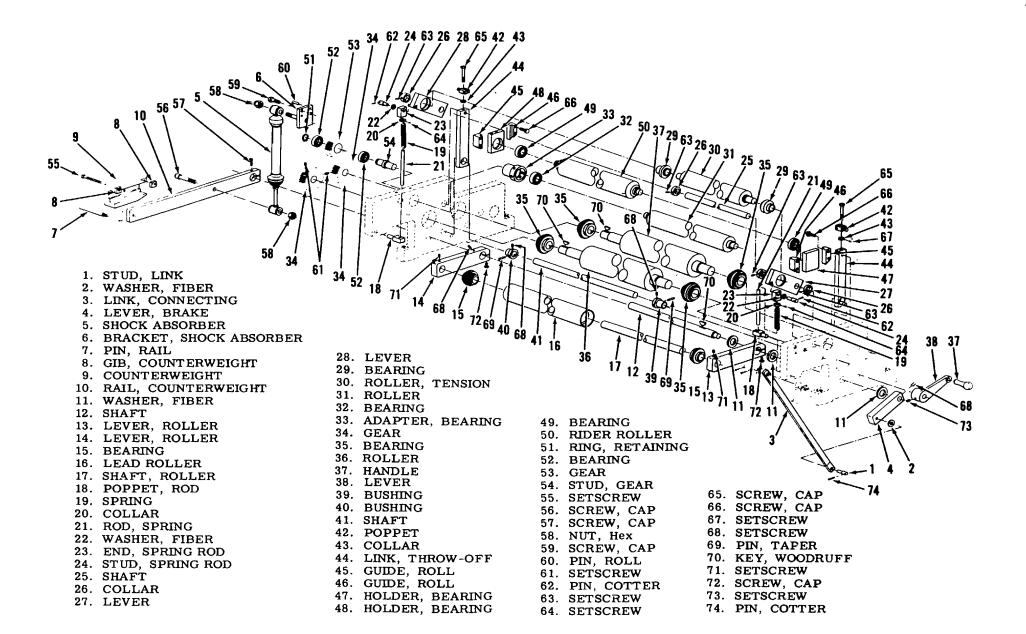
⁽²⁾. Feed Roll Assembly, Exploded View
